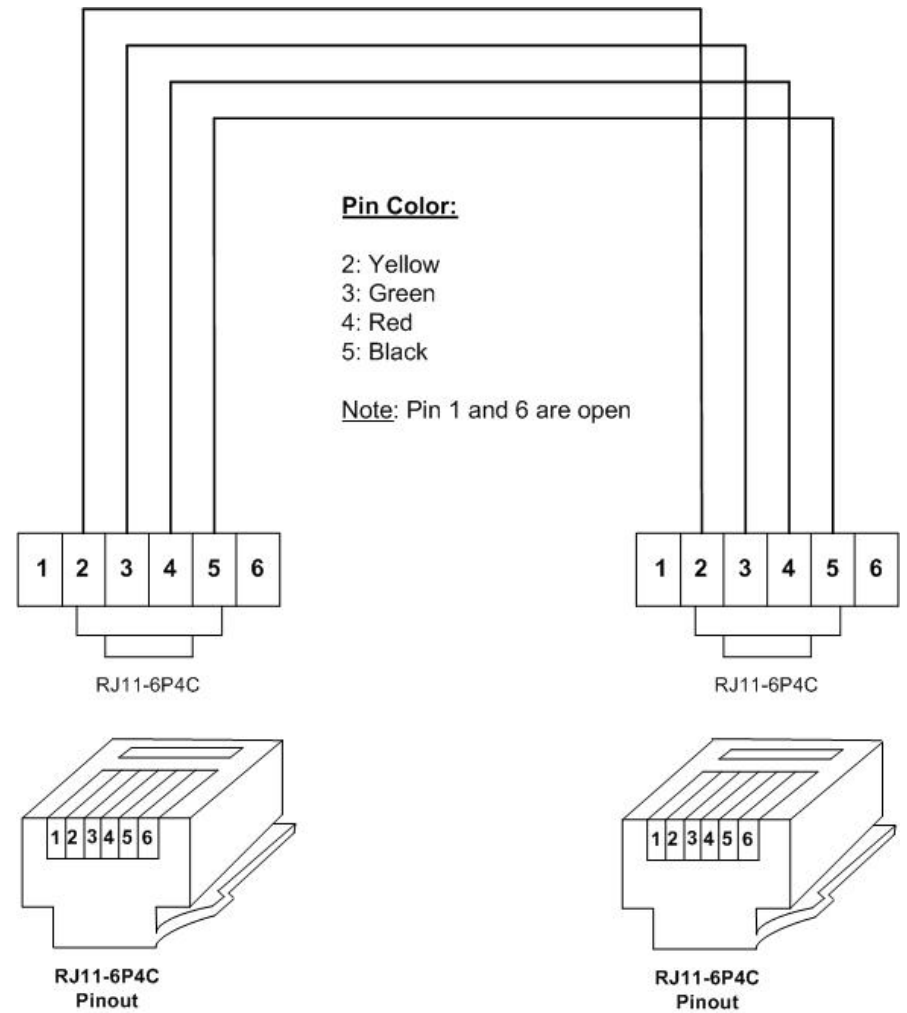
Interconnecting Wiring Cable between ELT Remote Unit and Main Unit, Part No. 4500041-4
